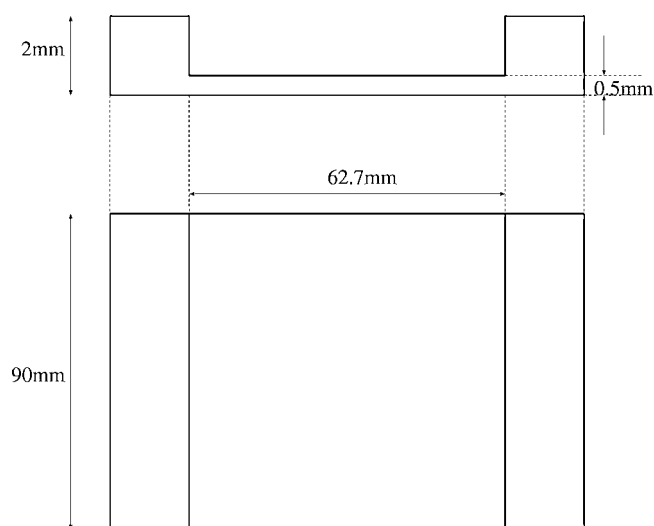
Schematic diagram of the Si(311) test crystal used in this study. The crystal is machined out of a single Si(111) cylinder 100 mm in diameter by 100 mm thick to leave final rectangular Si(311) crystal dimension of 62.7 mm × 90 mm × 0.5 mm with thick supports.
